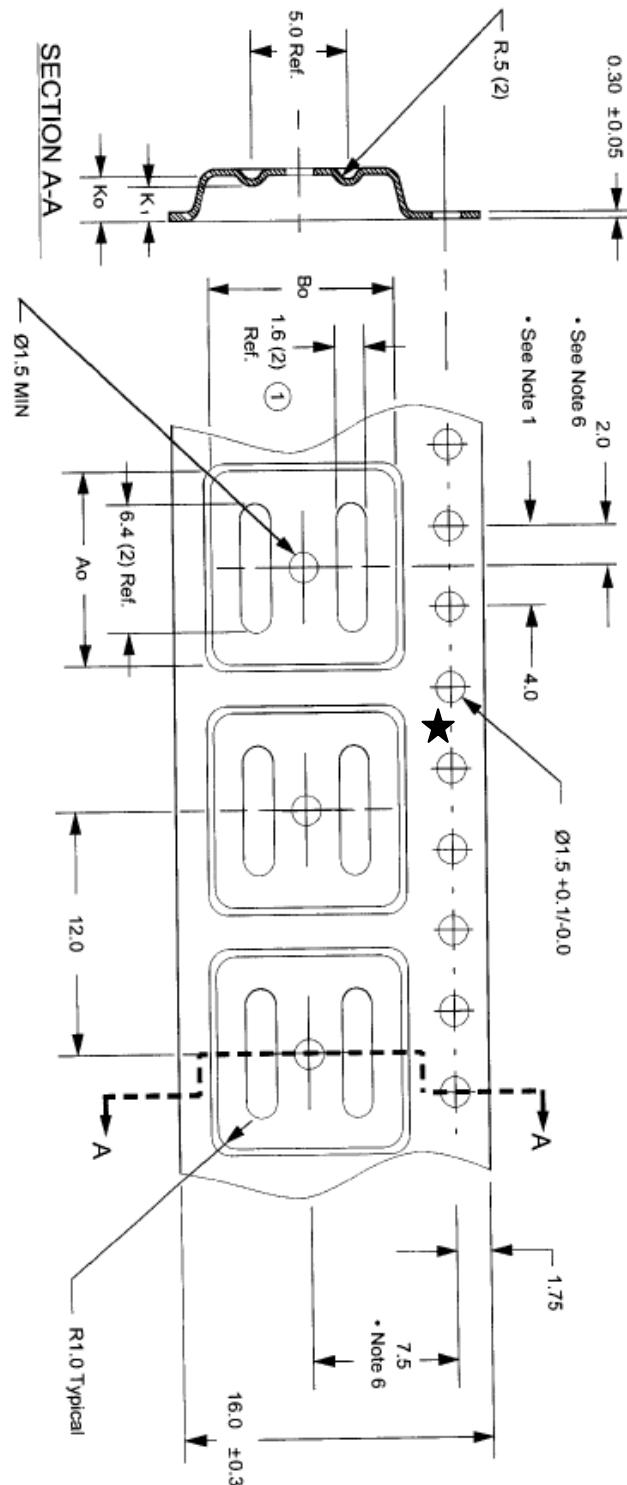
VNC2 – LQFP-32, VNC2 – LQFP-48, FT311D – LQFP Carrier Tape Dimensions
